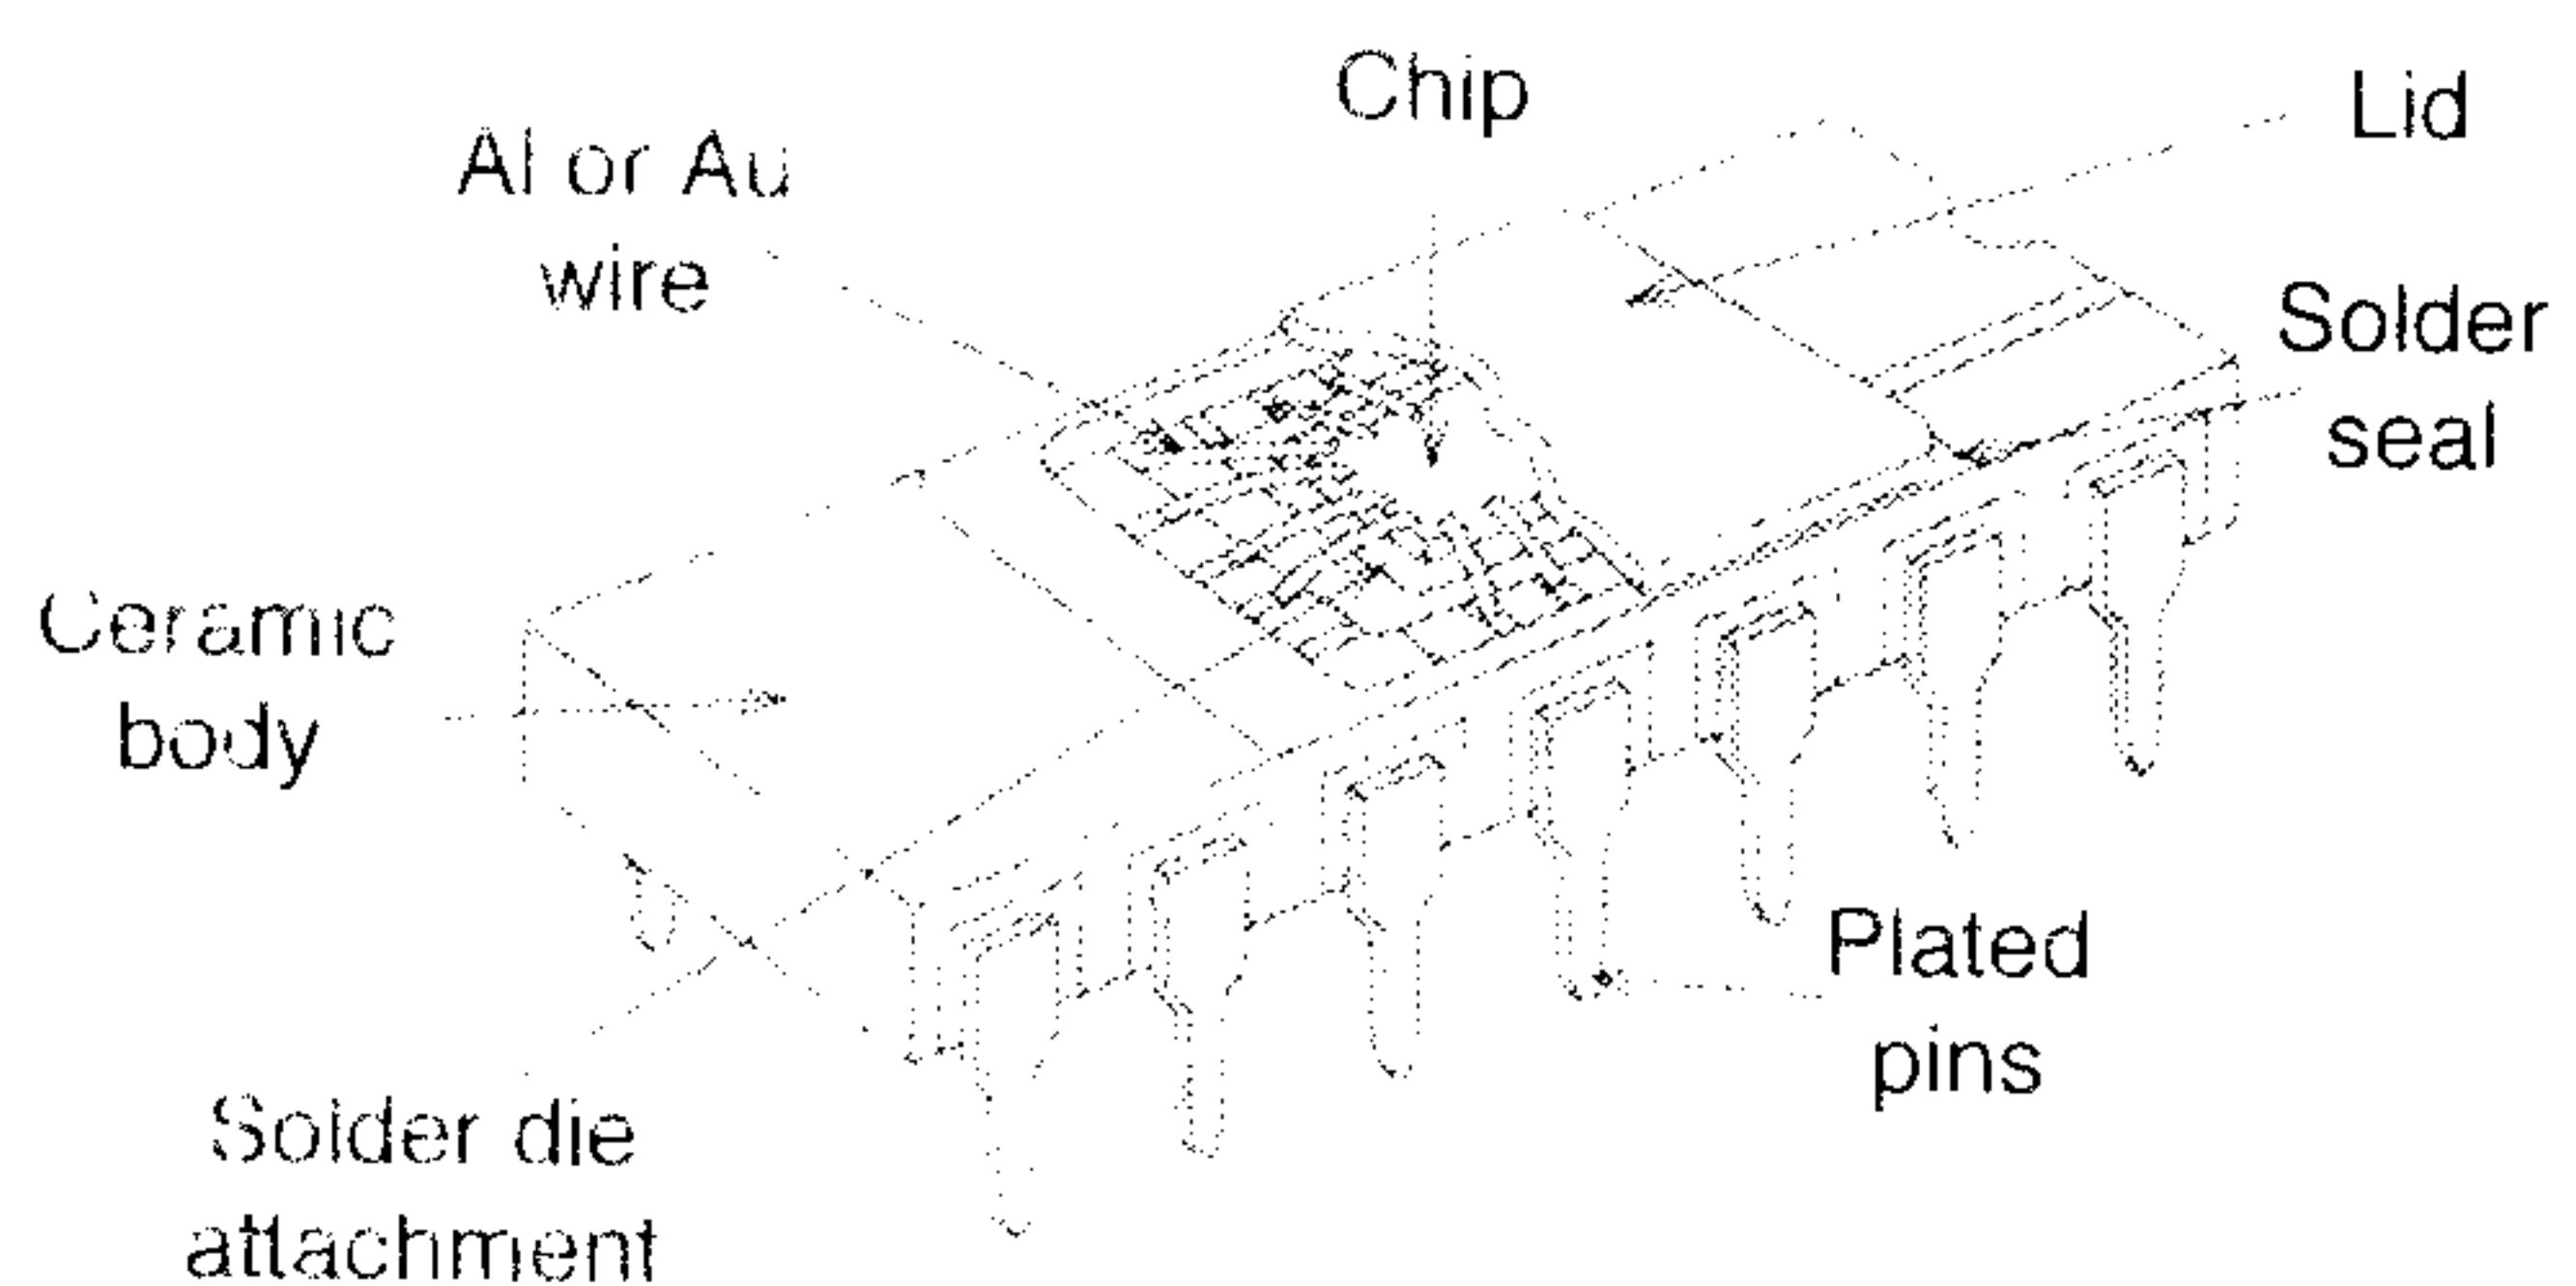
Drawing of a co-fired ceramic DIP showing construction details
